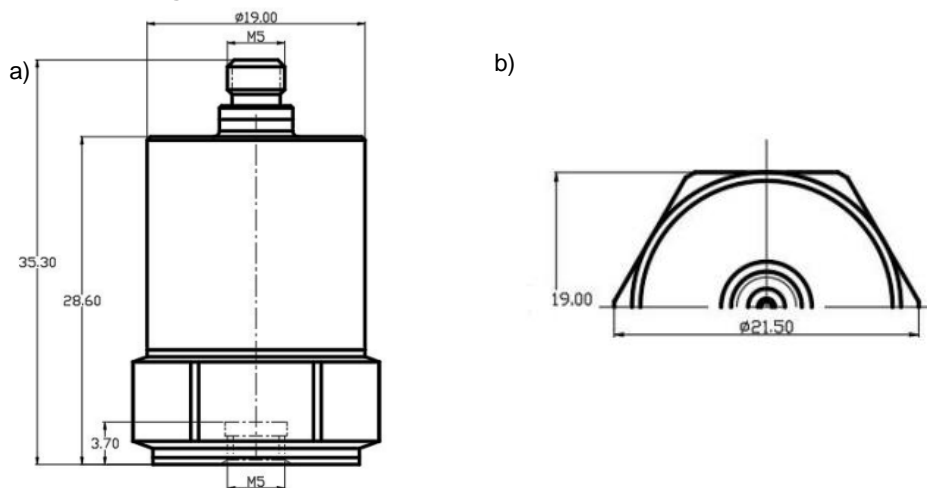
Mechanical dimension SSA-P9UCB6 a) side view b) top view
